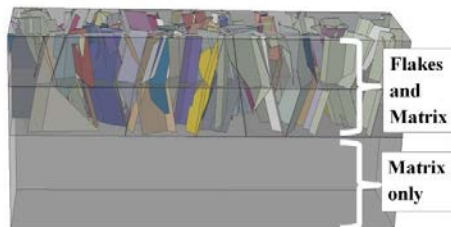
Workpiece with planar partitions representing graphite flakes shown in color and matrix shown in gray.
